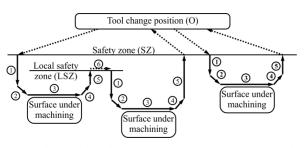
Scheme of the milling cutter movement during pure machining of surfaces on a triaxial CNC machine.
